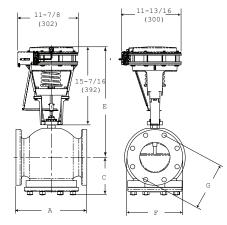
MK-6911 with Flanged 2-Way Globe Valves^a a - Shown with positive positioner
